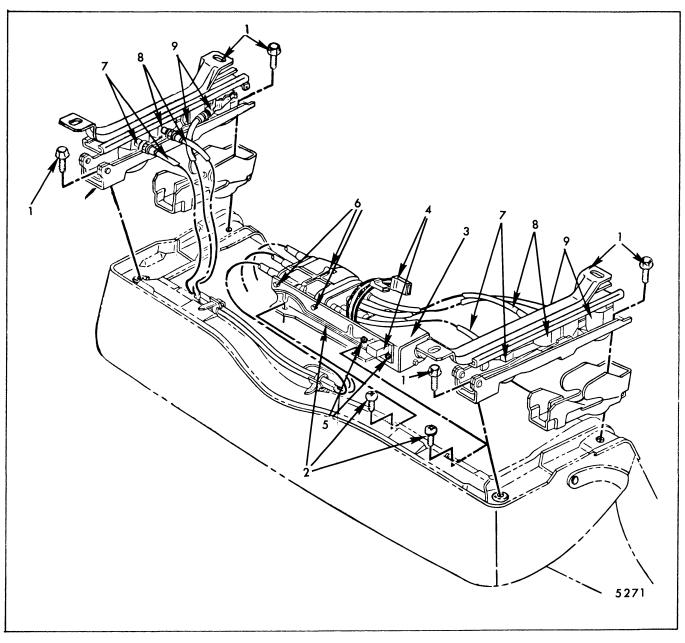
Power Operated Six-Way Seat Adjusters, Motor Transmission and Drive Cables - Full Width Seats
